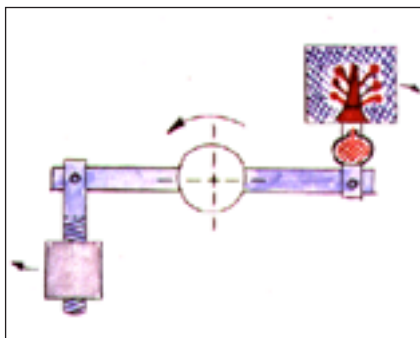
Sketch of a variable geometry centrifugal casting machine (plan view)
